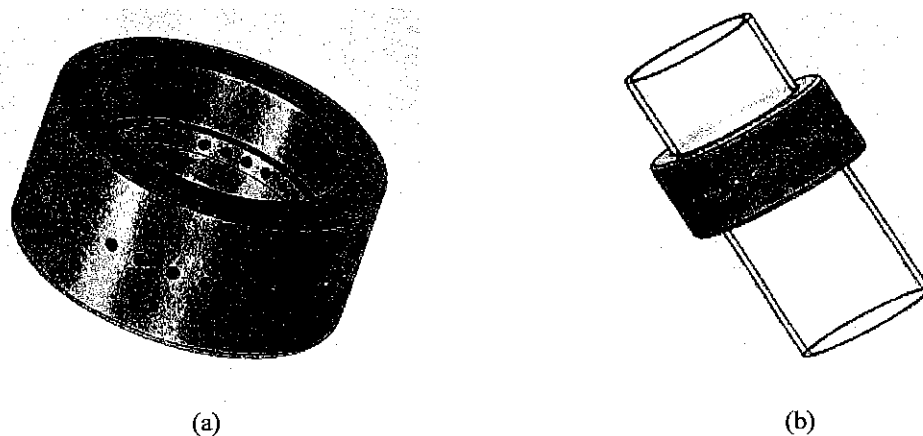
New design for sensor jig, (a) Single jig design; (b) Jig embedded on acrylic cylinder.
